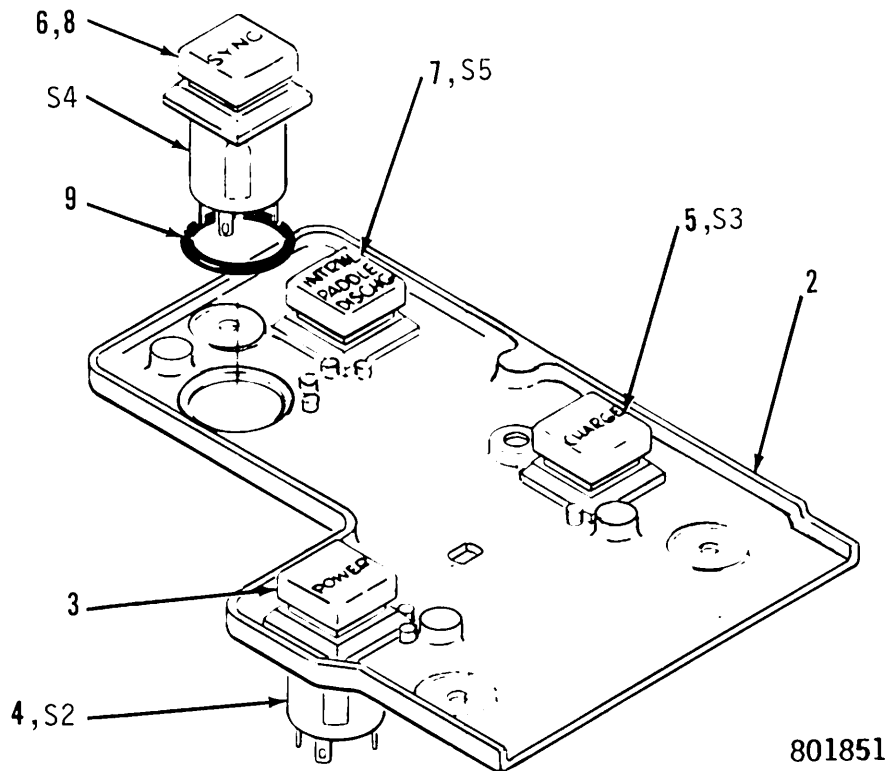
CONTROL PANEL ASSEMBLY
